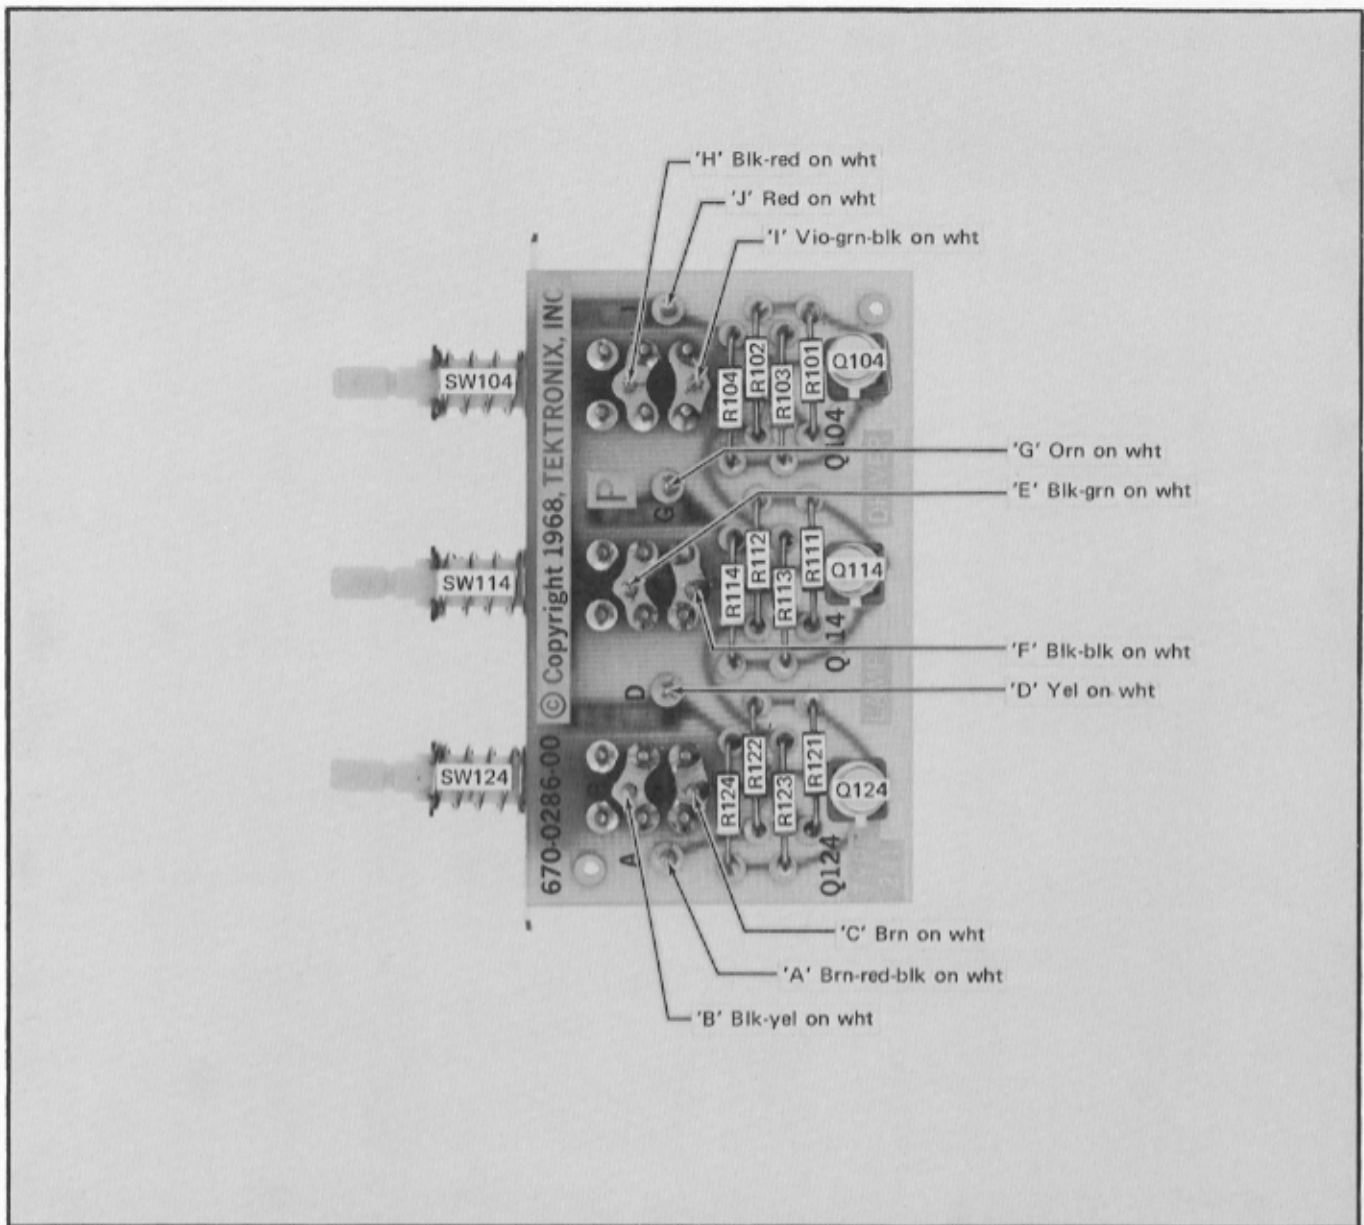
Lamp Driver circuit board showing component locations and wiring color code.
